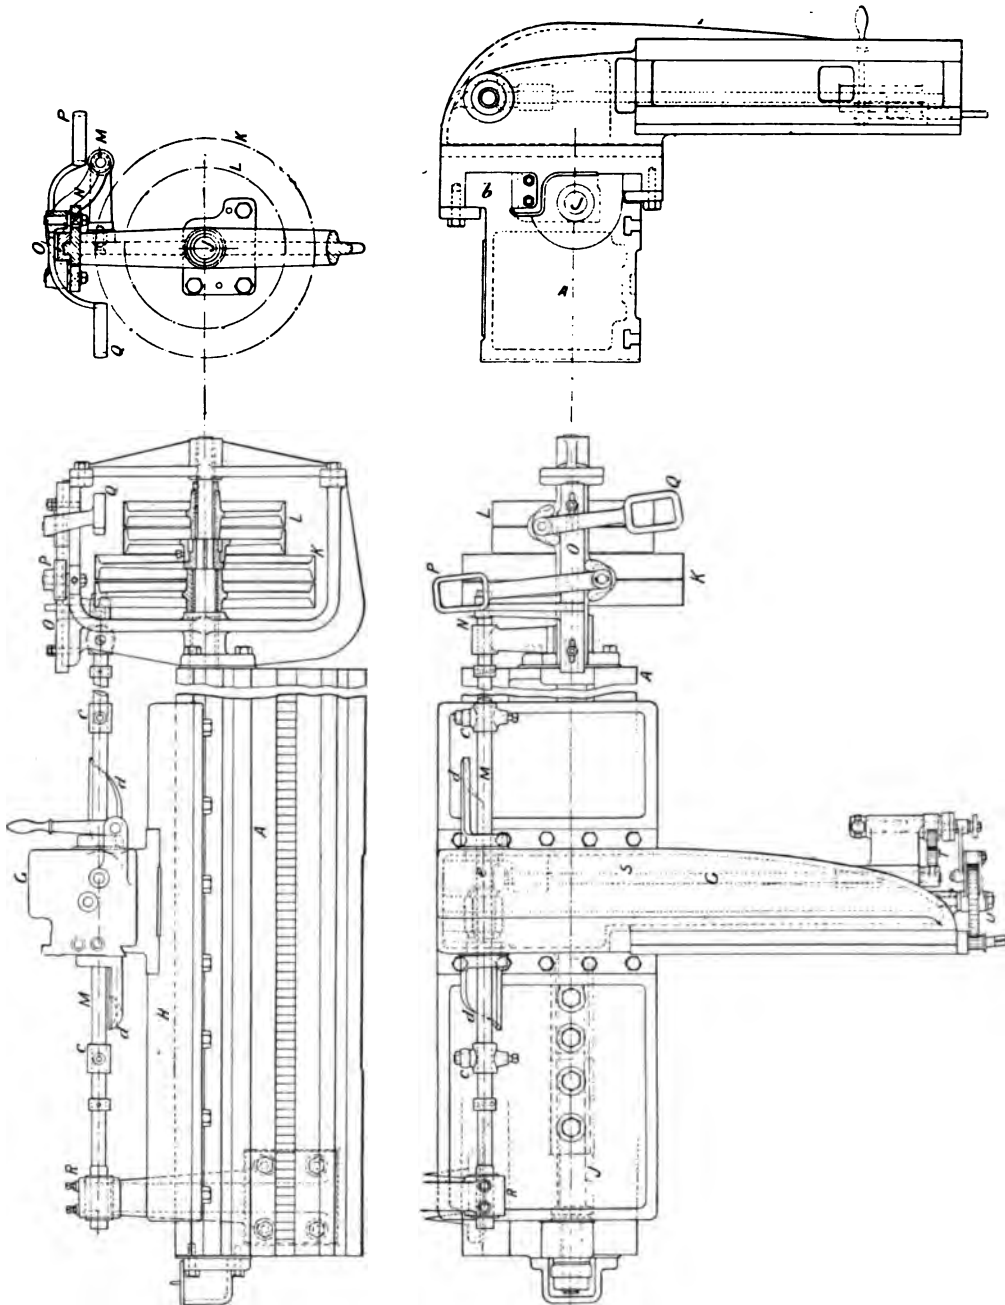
Tool Arm, and Carriage of Side Planer.
